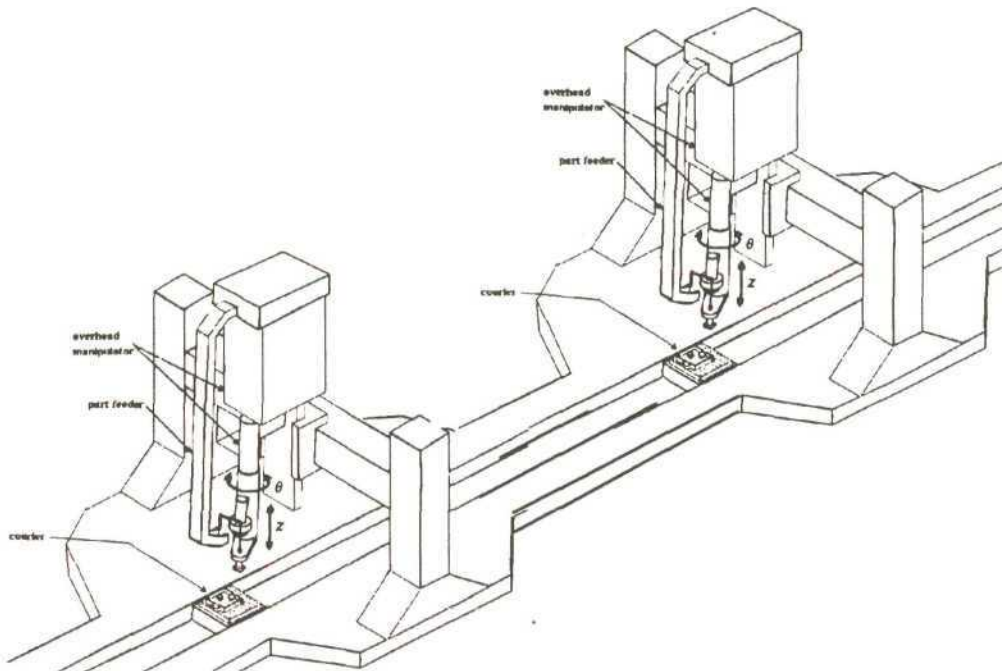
Complete in-line assembly system with multiple assembly stations and couriers.
